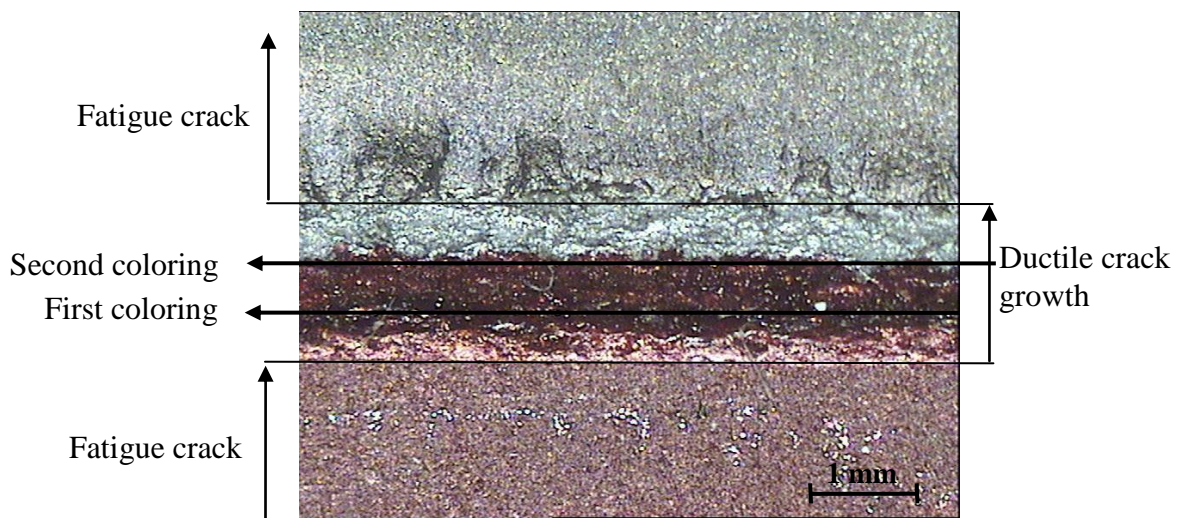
Picture of middle section of the crack surface from a test specimen, showing the different crack fronts created by colouring and fatigue loading.
